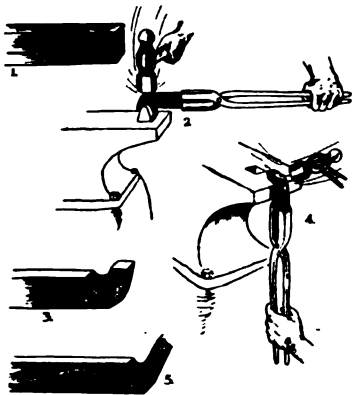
Steps in making a lathe tool. The work should be done during one heat.
